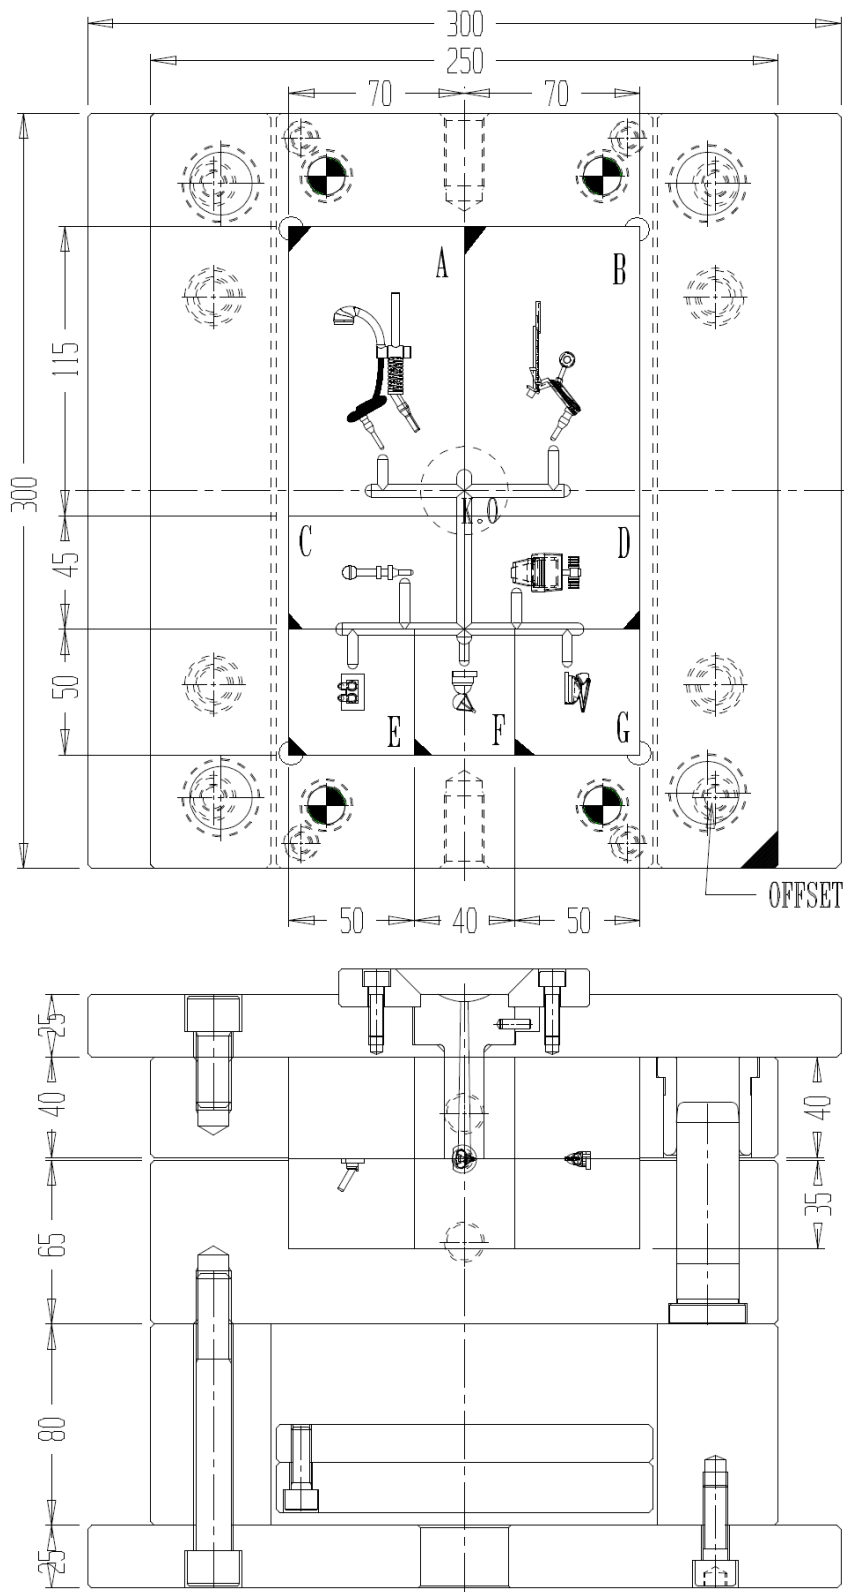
Mould assembly drawing generated by the ICMLDS prototype in case study II
